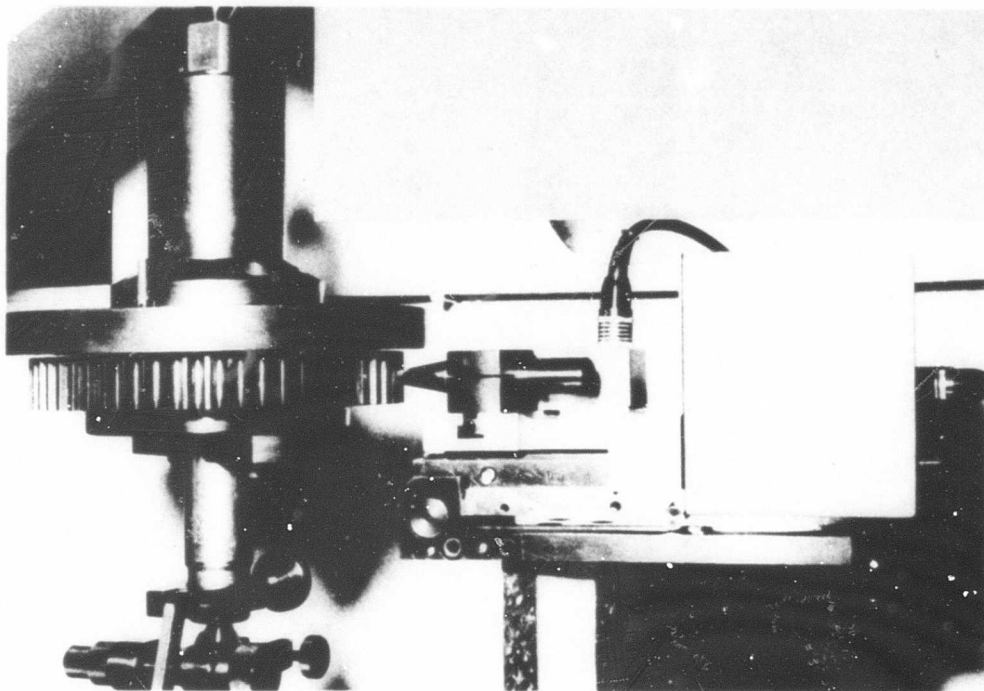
Measurement of Runout on the Lower Stage Planetary Sun Gear Performed by the Hofler Gear Measuring Machine.
